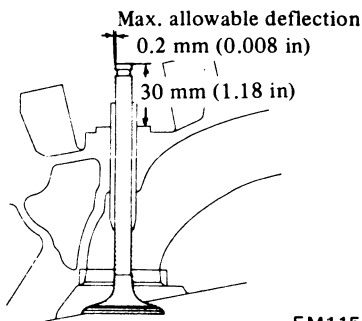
Measuring Clearance between Valve Stem and Valve Guide
